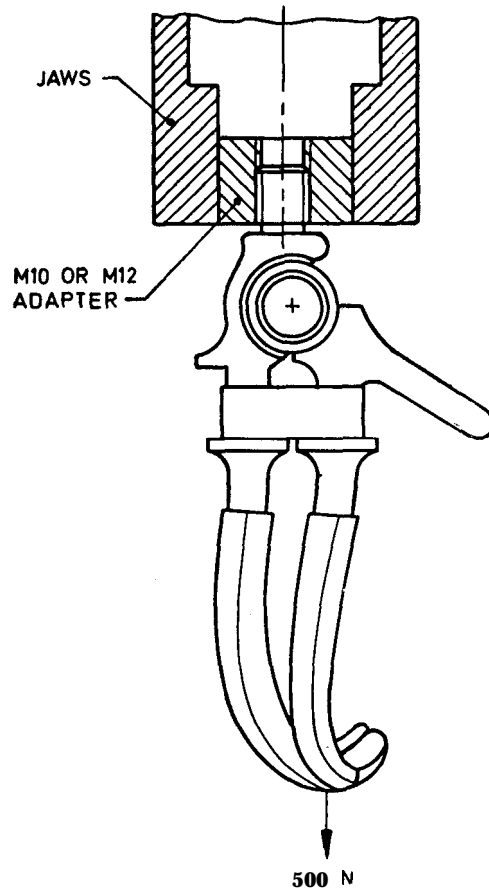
LOAD TESTING ARRANGEMENT FOR HOOK
